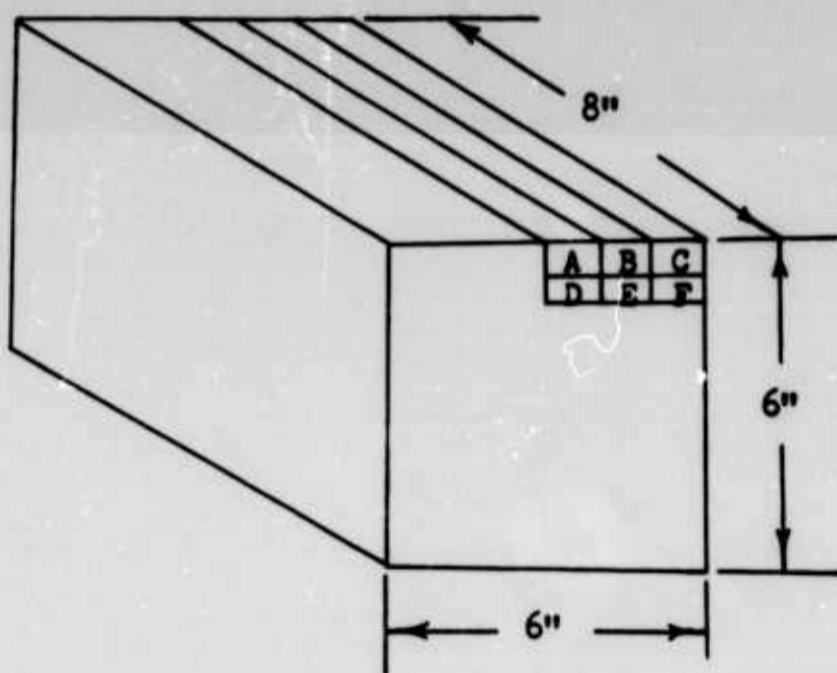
U-Bend Specimen Locations in AM 355 Billet
